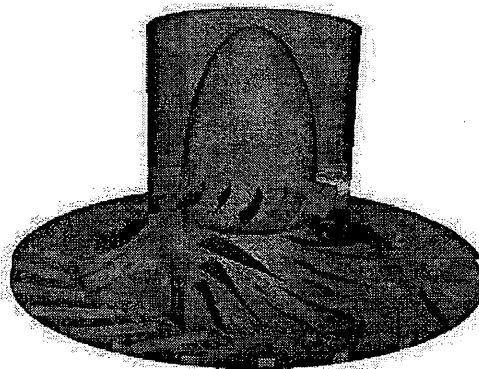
Geometry of a SSME pump including inlet guide vanes, impeller and diffuser blades.
